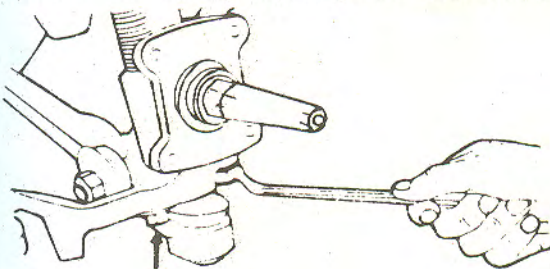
Removal of the spring strut from the steering knuckle at the bottom of the front suspension.
